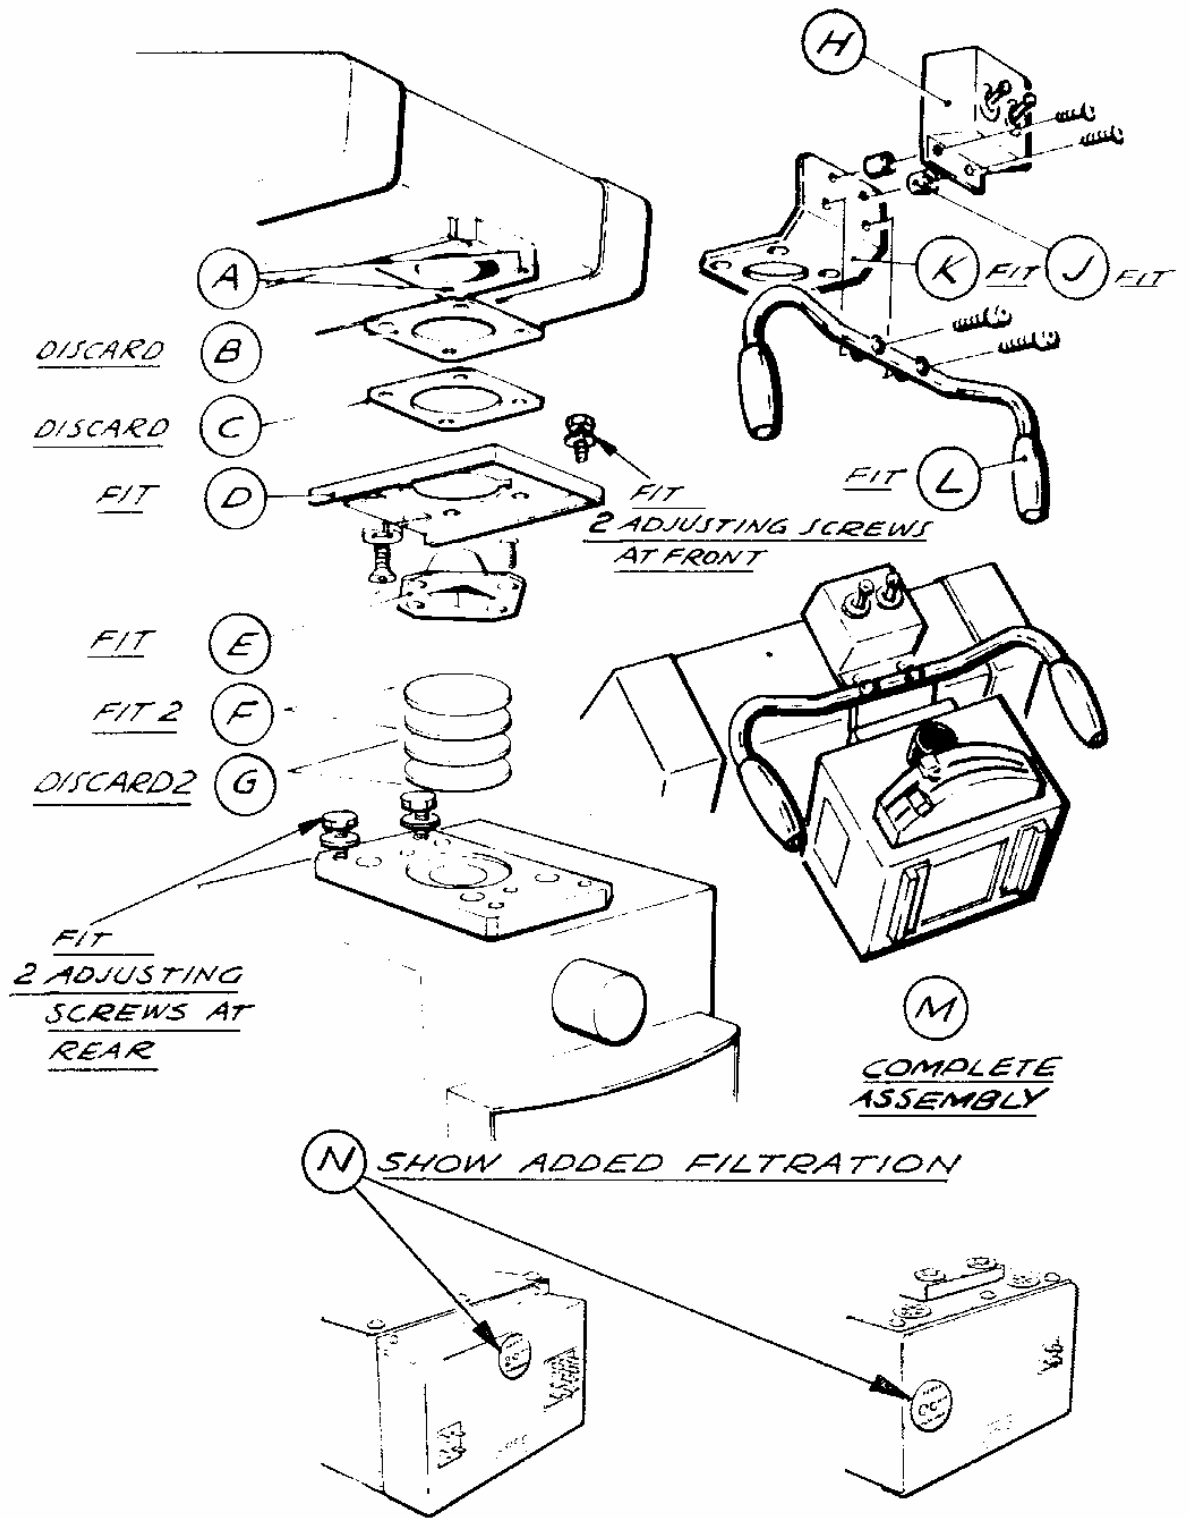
Fitting Demarcator to X-ray Tube with Early Type Switchbox and Setting Filtration Indicator
